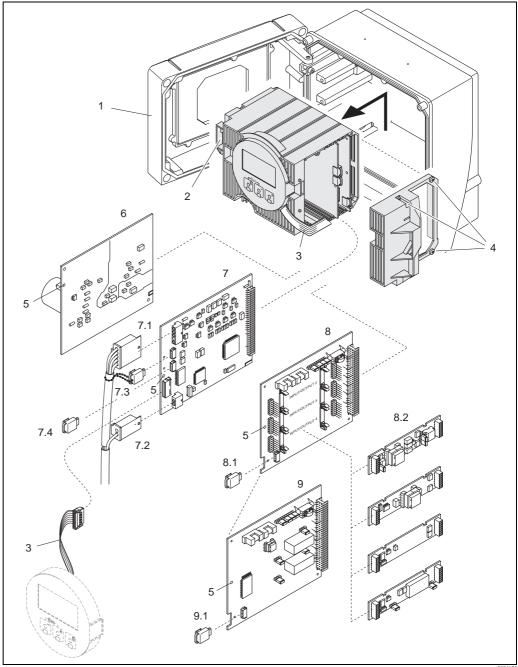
Wall-mount housing: removing and installing printed circuit boards
